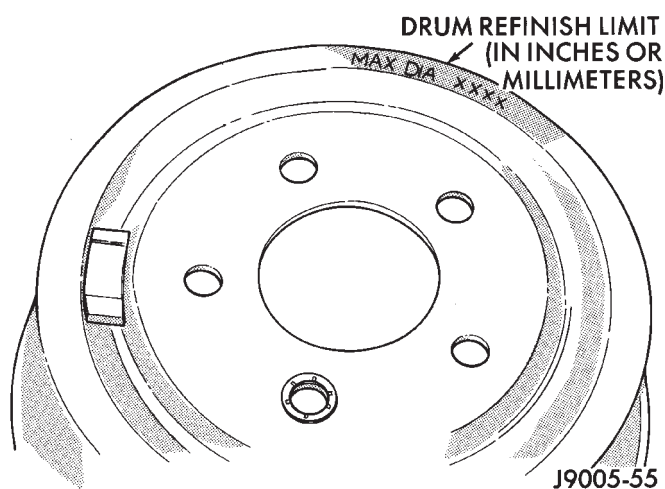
Typical Location Of Brake Drum Refinish Limit
